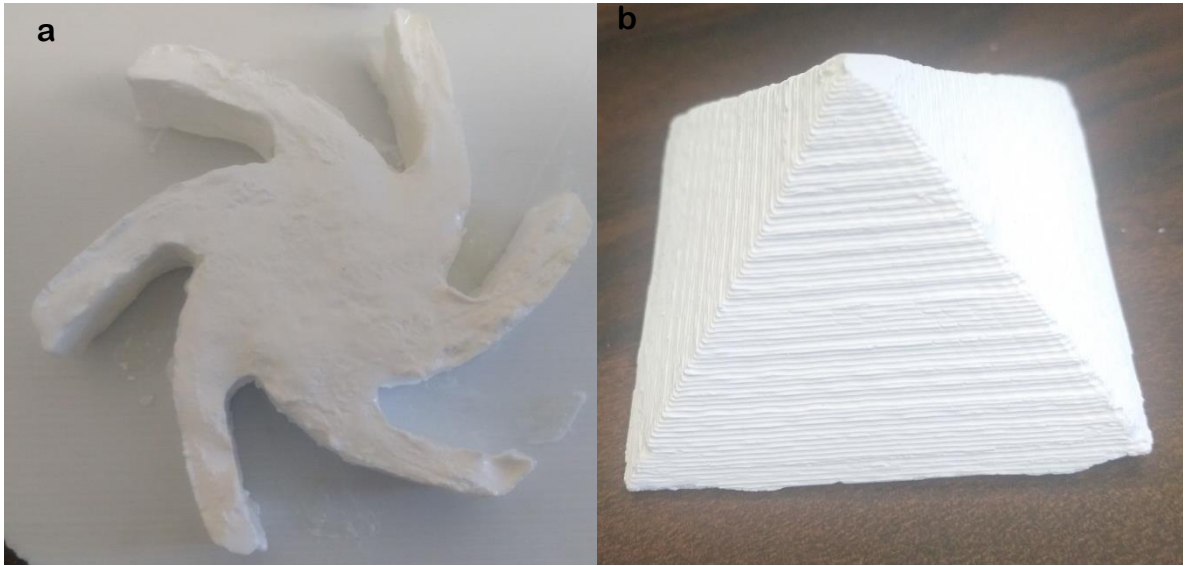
Illustration of complex shaped parts produced, a) as demoulded 6-blade impeller and b) a dried solid pyramid showing markings as a result of the resolution on 3D printed moulds.
